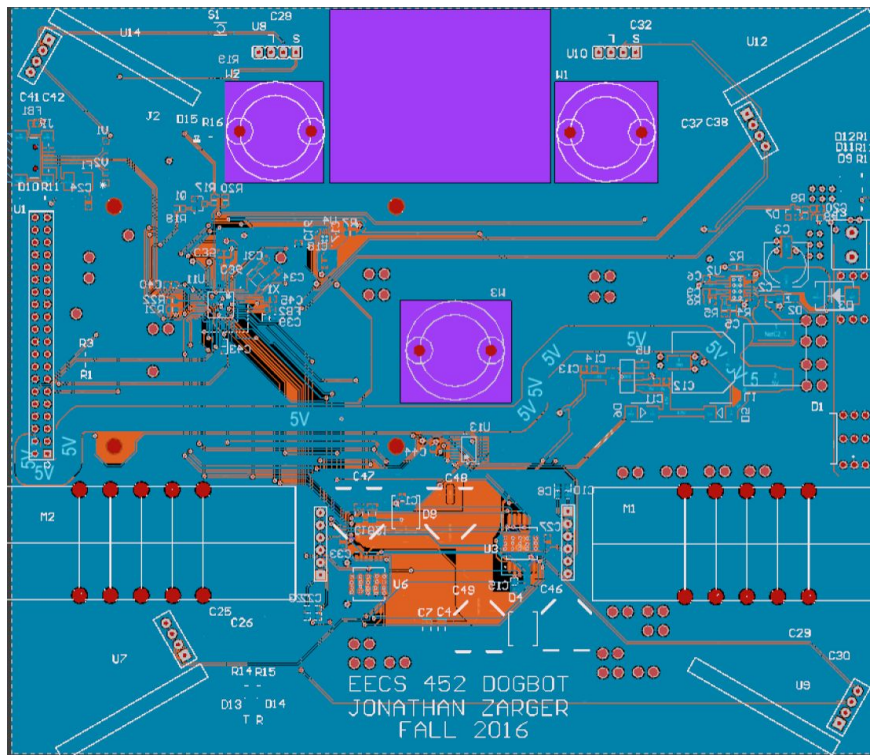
Visualization of Bottom Layer of Chassis PCB
